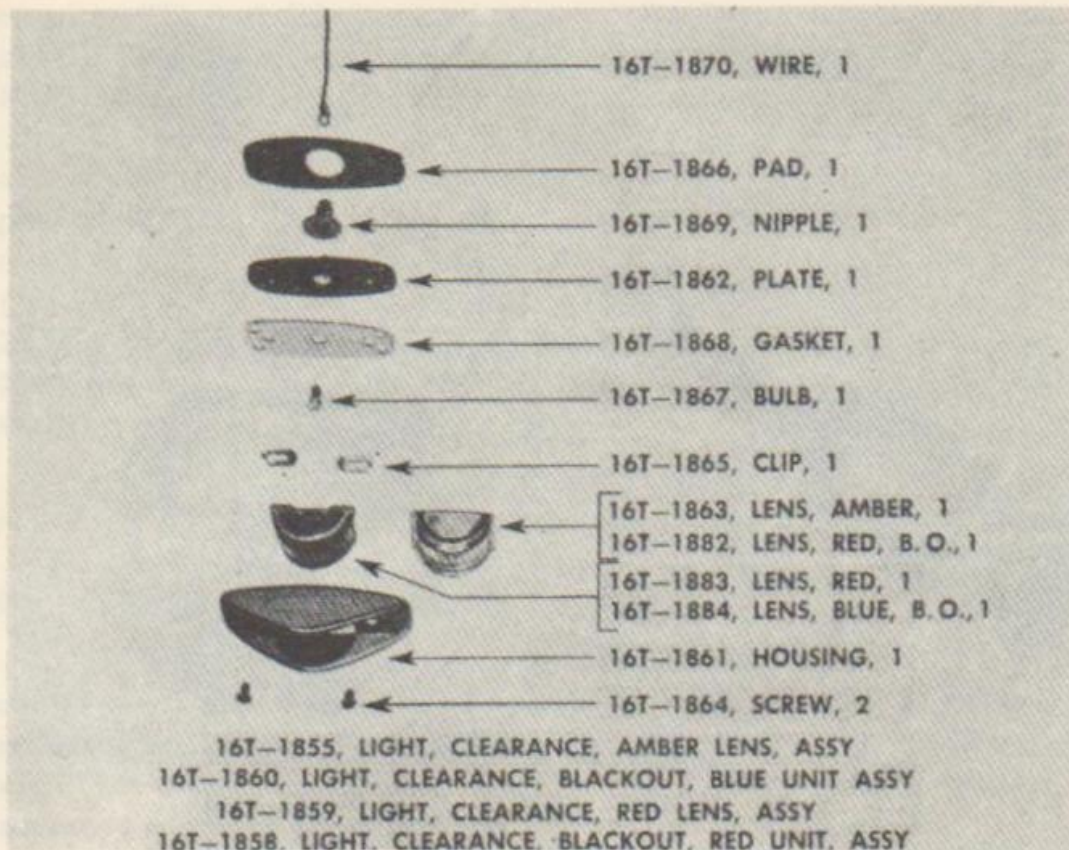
CLEARANCE LIGHT—EXPLODED VIEW
